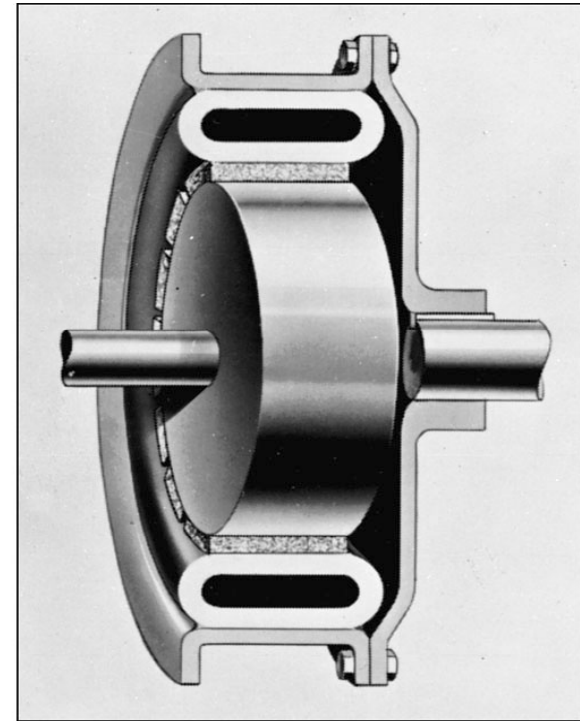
An external contracting clutch-brake that is engaged by expanding the flexible tube with compressed air.
